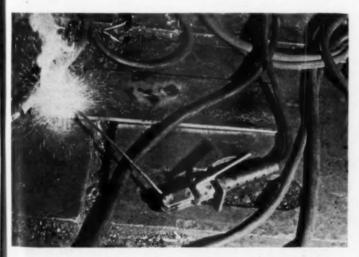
Dangerous welding practice. Electrode holder should never be thrown or placed where it can make contact with conducting material.
